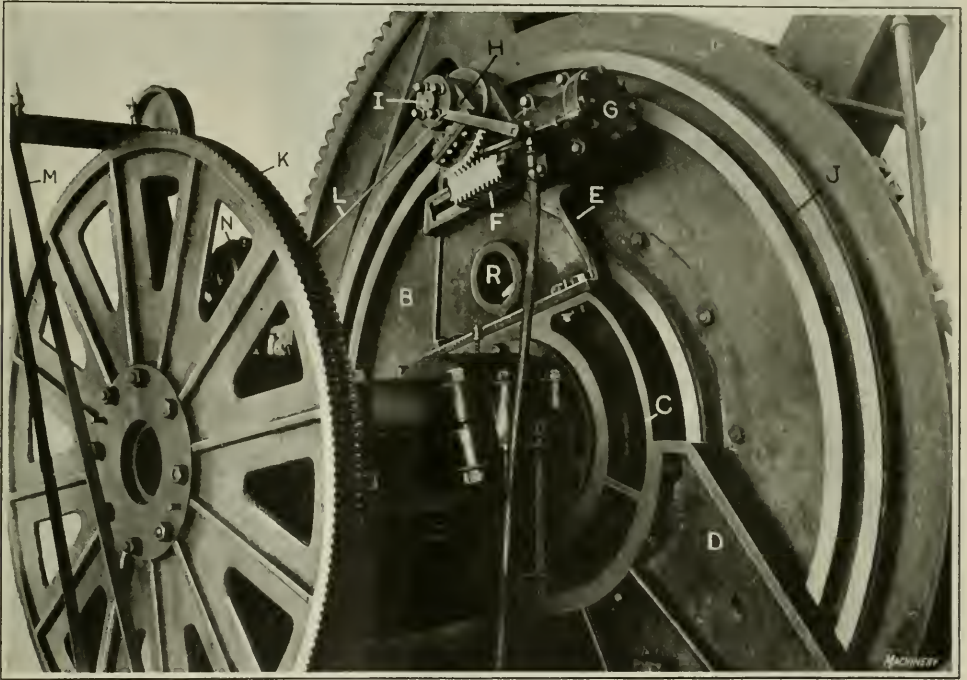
Air-operated Device for clamping the Faceplate to the Driving Shaft of the Machine, and Indexing Mechanism
